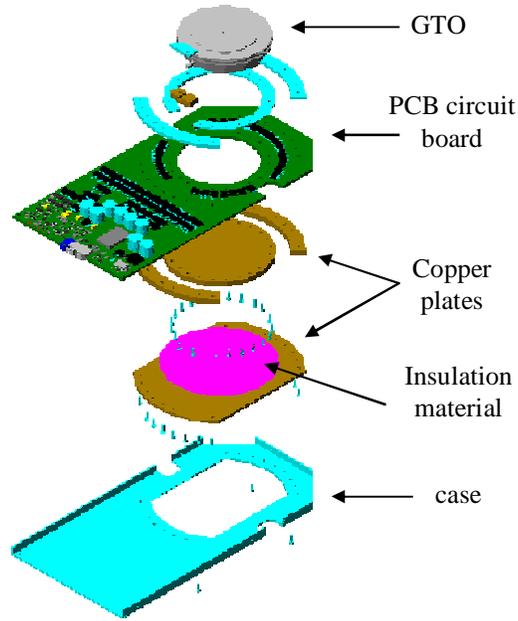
The mechanical assembly drawing of the new generation ETO
